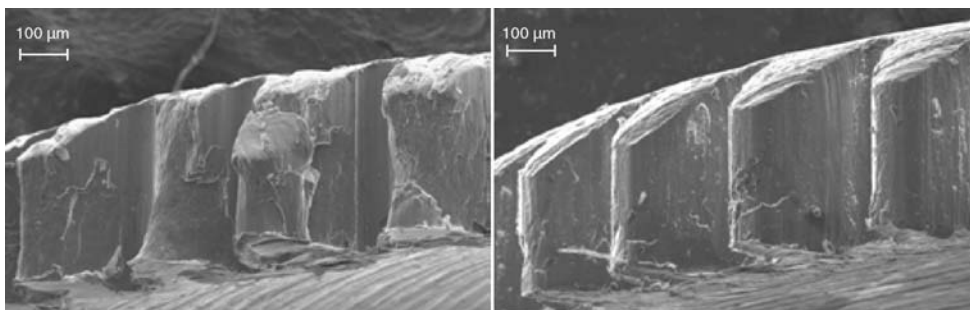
Gearwheels stamped without (left) and with (right) laser assistance.
